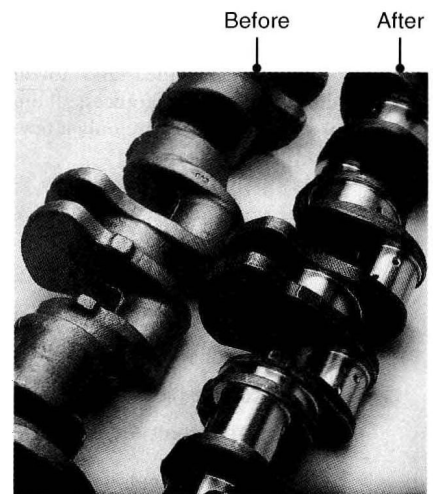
A forged crankshaft before and after machining the bearing surfaces. The shiny bearing surfaces of the part on the right cannot be made to their final dimensions and surface finish by any of the processes described in previous chapters of this book. *Source:* Courtesy of Wyman-Gordon Company.
